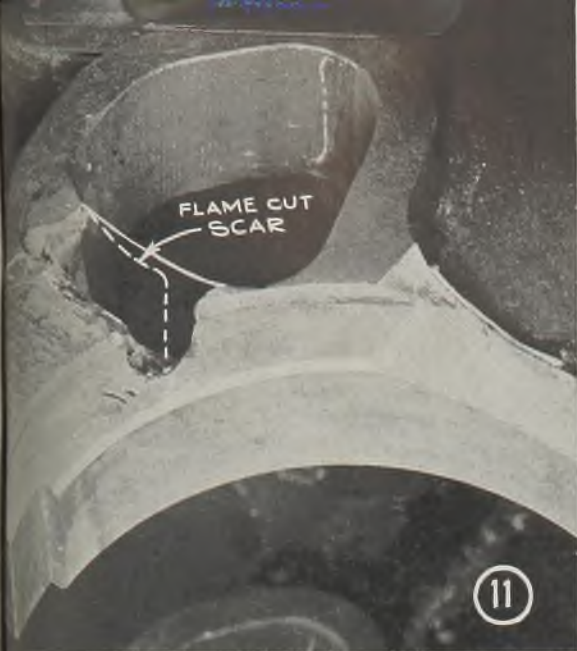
Defect in diesel block thrust bearing saddle
